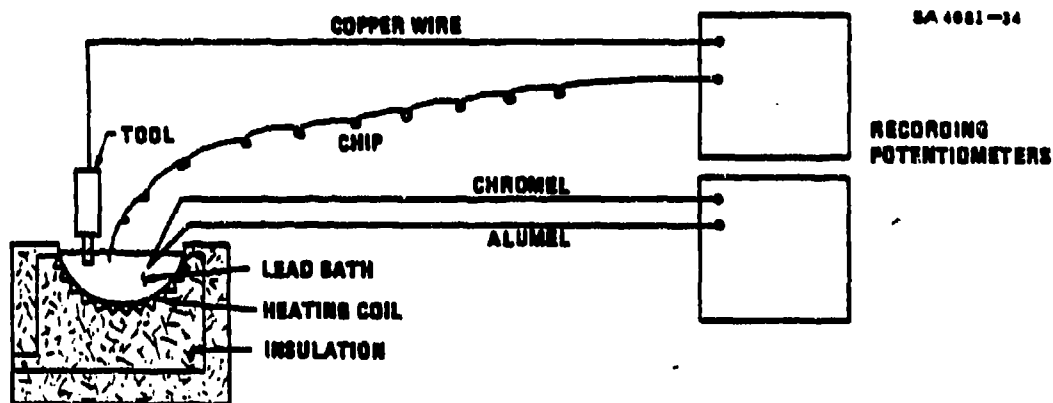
Arrangement for Calibration of Tool-Work Thermocouple
